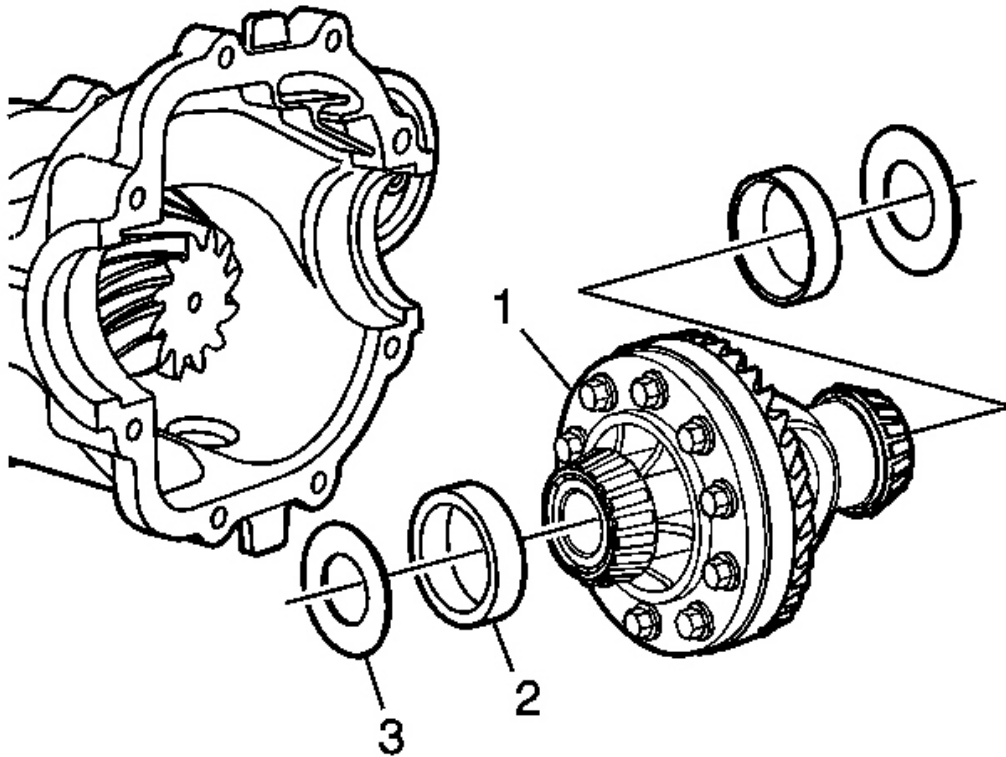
Removing Carrier Assembly, Bearing Races & Shims
